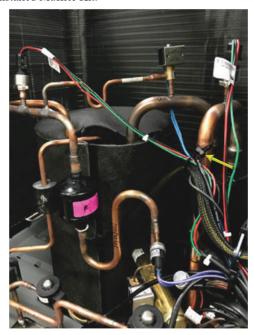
Secure Wires to Suction Tube with Wire Tie
